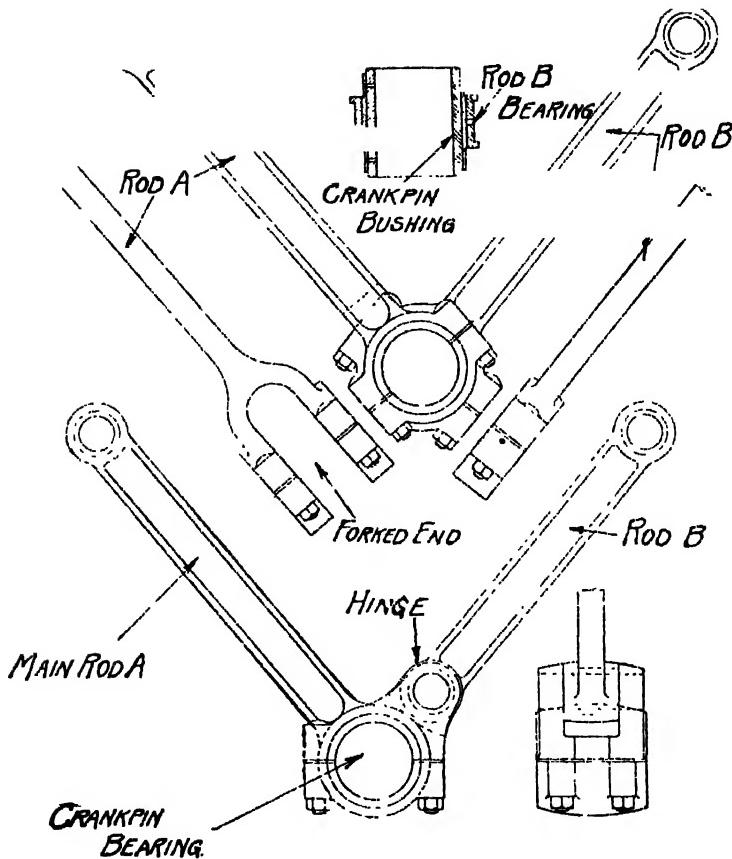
Showing Construction of Connecting Rod Needed with Eight Cylinder V Engine Unless Carried Side by Side on Crankpins.
